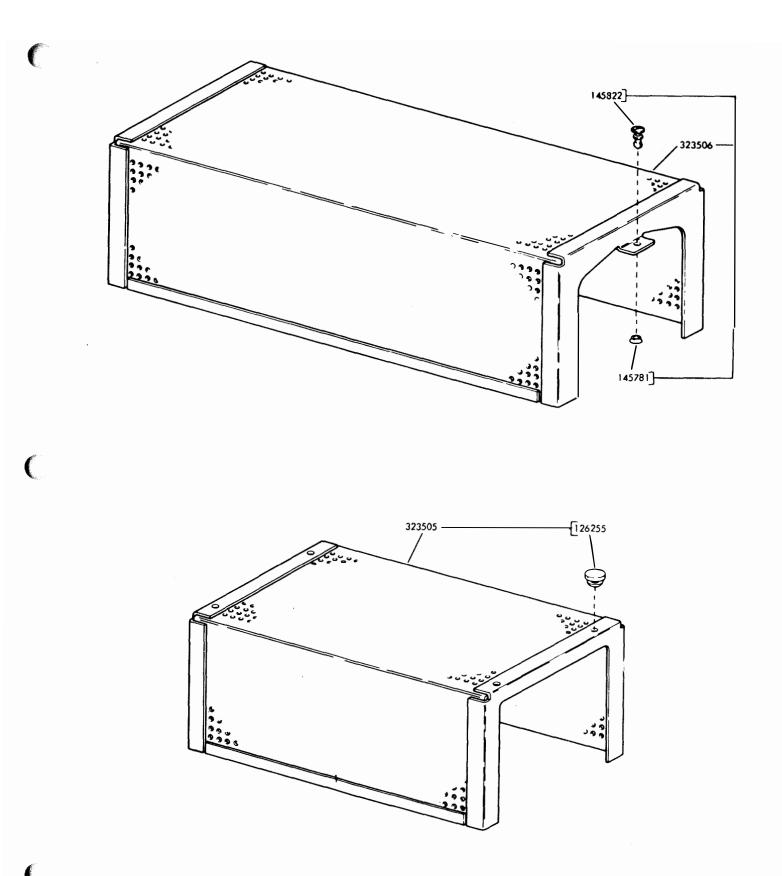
Electrical Service Assembly Covers (Sheet 2 of 2)
